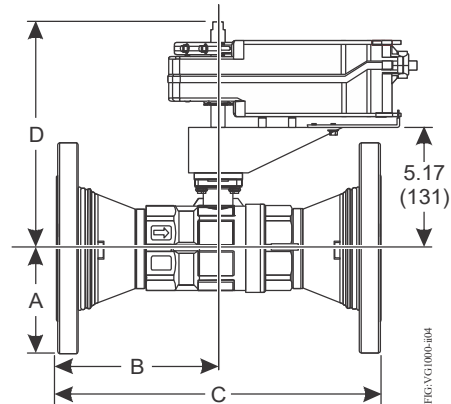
M9220 Actuated VG18A5xx Three-Way Series Ball Valves, in. (mm)
